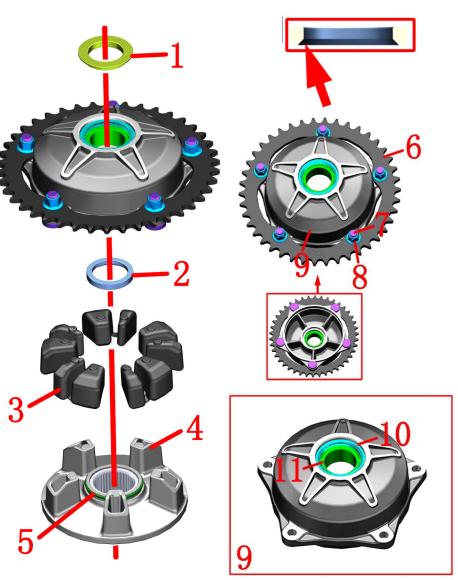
Rear wheel, swinging		Sprocket assembly 2	CHK	401
